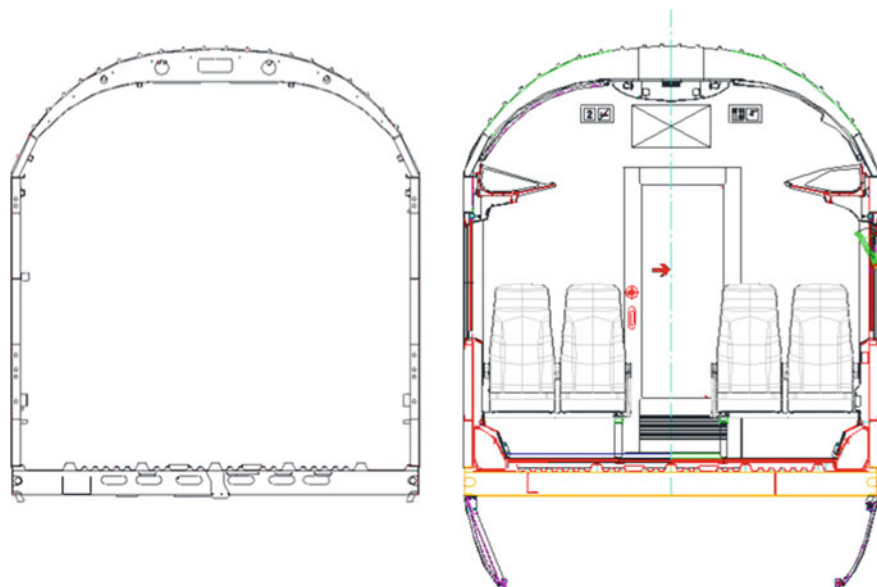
Cross-section of the carbody structure and the welded structure
